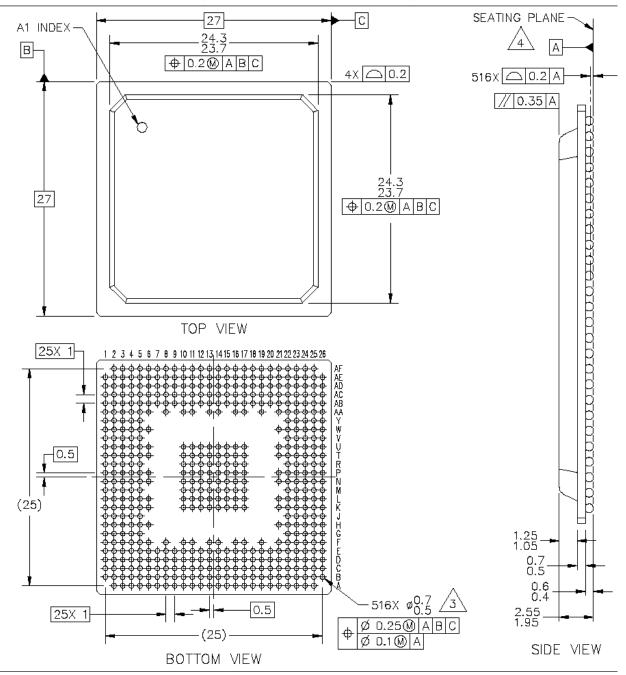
Mechanical Dimensions and Bottom Surface Nomenclature—516 PBGA
